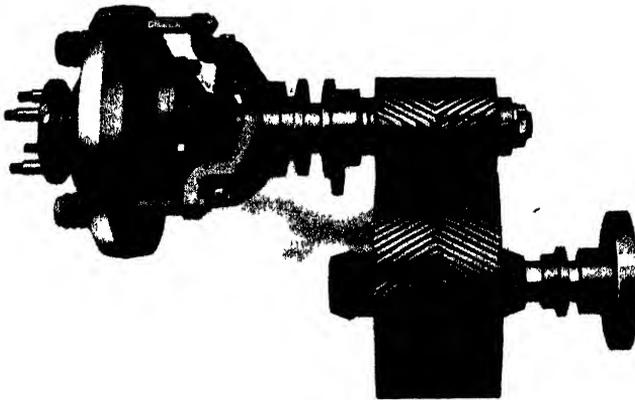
Revolving Parts of Reverse Gear and Reducing Gear Wheels
